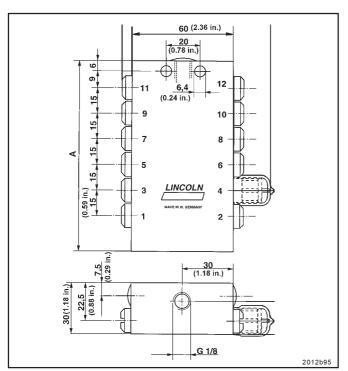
Dimensions of bottom mounted SSV Divider Blocks
